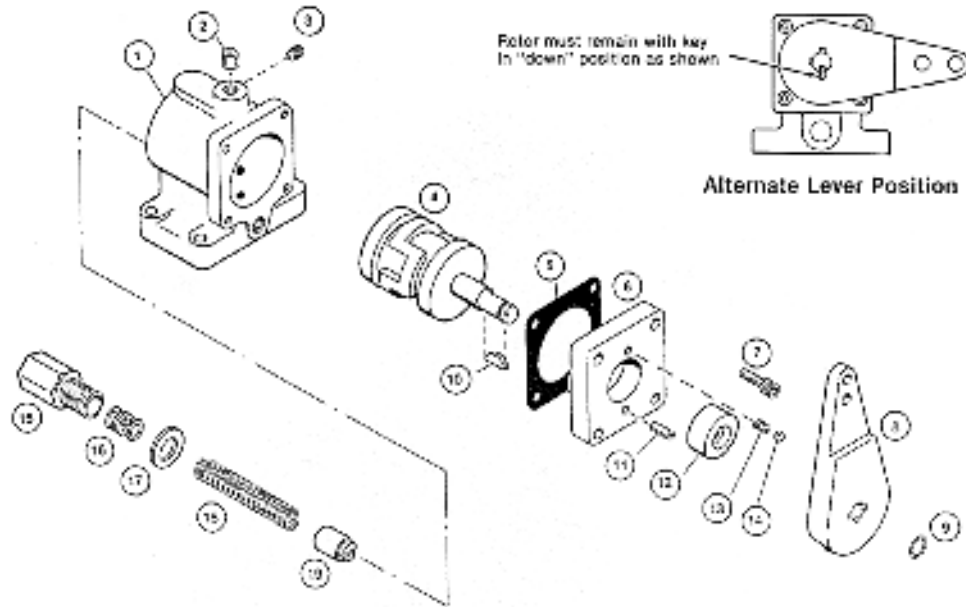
Duplex Pump Assembly, Direct Engine Mounted
